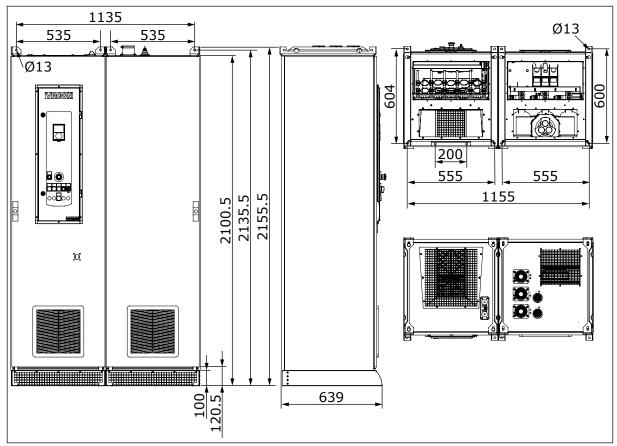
The dimensions of the cabinet with the optional sine filter, MR10, [mm], IEC
